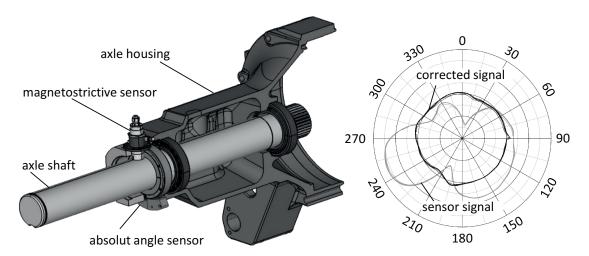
Sensor assembly in the rear axle housing and signal correction via an absolute angle sensor
